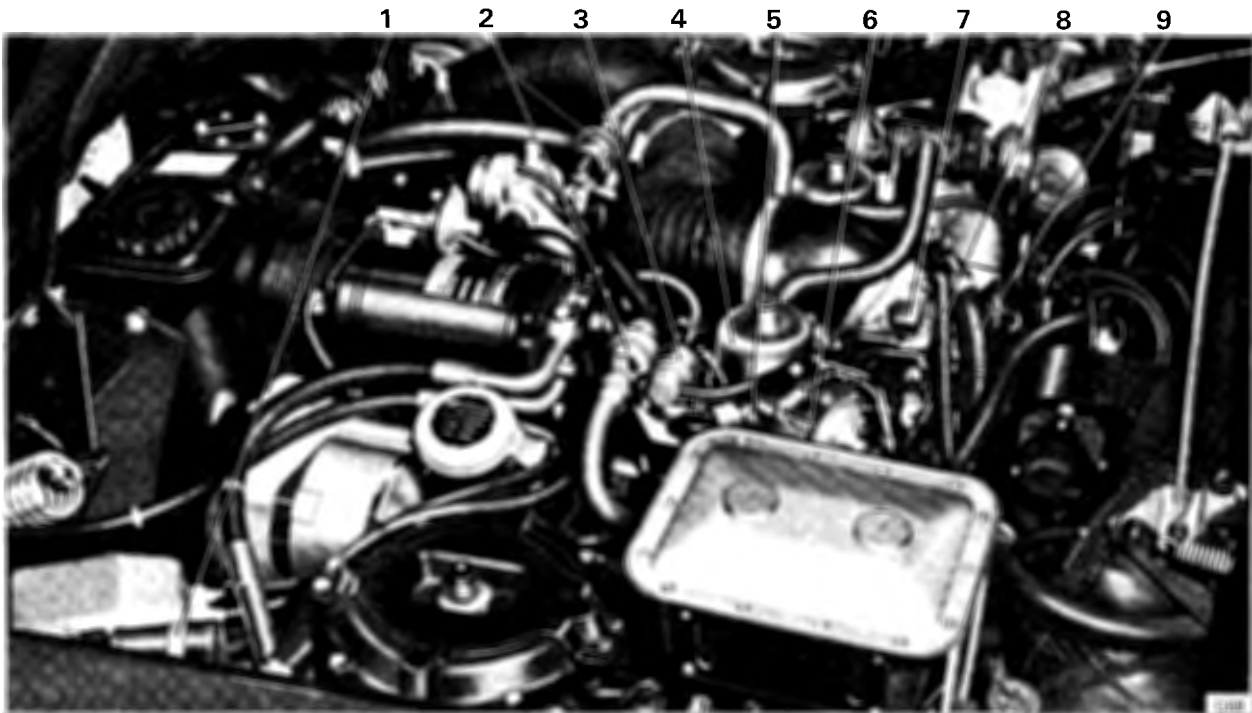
VIEW INSIDE ENGINE COMPARTMENT (From Right-hand side of Car)
